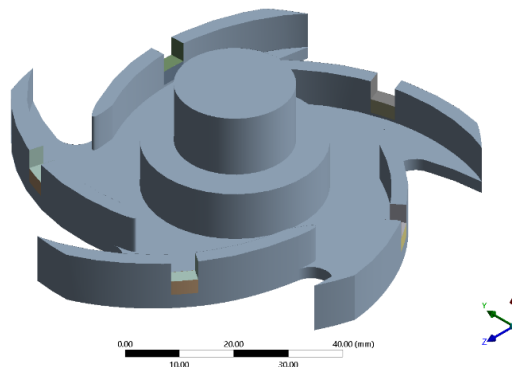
Impeller Fault with crack at the top on the blades
